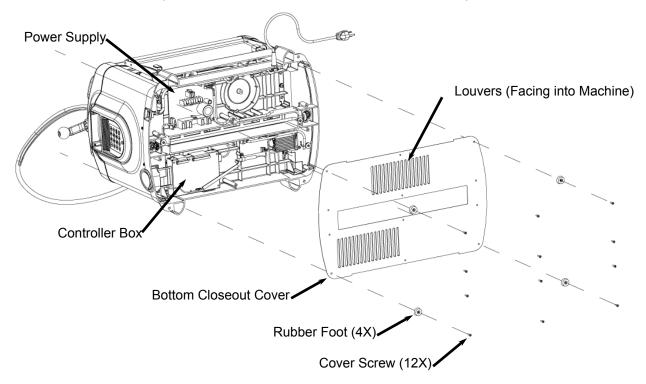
REMOVAL OF THE BOTTOM COVER
